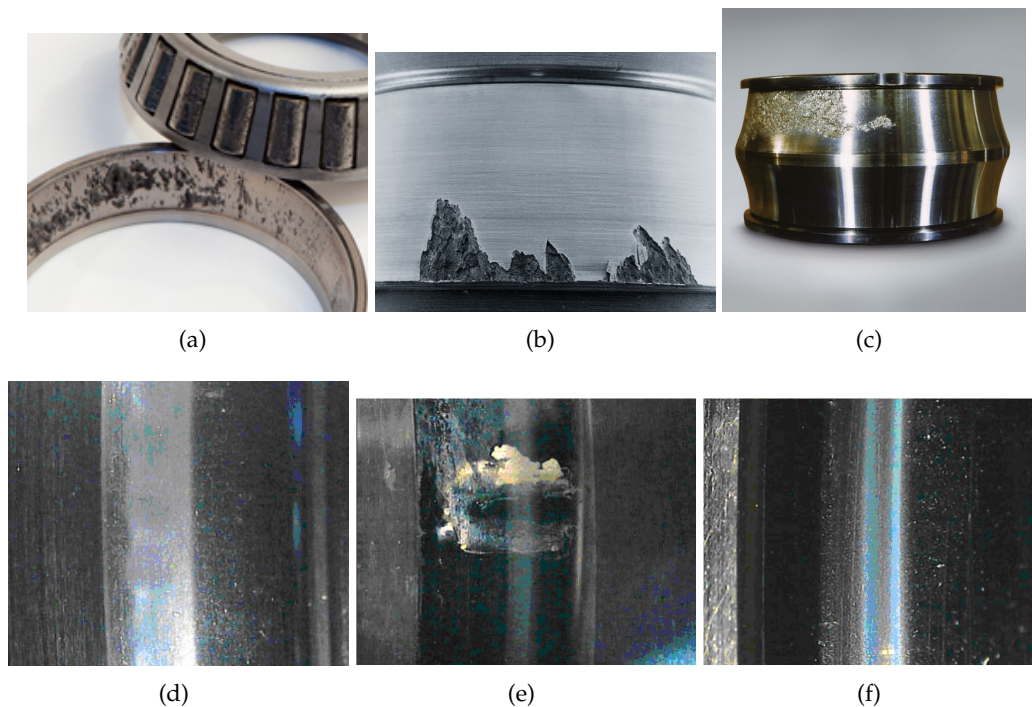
Bearing and races damages: (a) bearing and outer race pitting, (b) race spalling, (c) inner race flaking; damage produced by (d) brinelling, (e) corrosion and (f) misalignment on the race.
